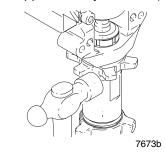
Fig. 13. Fill packing nut with Graco TSL until fluid flows onto the top of seal.
